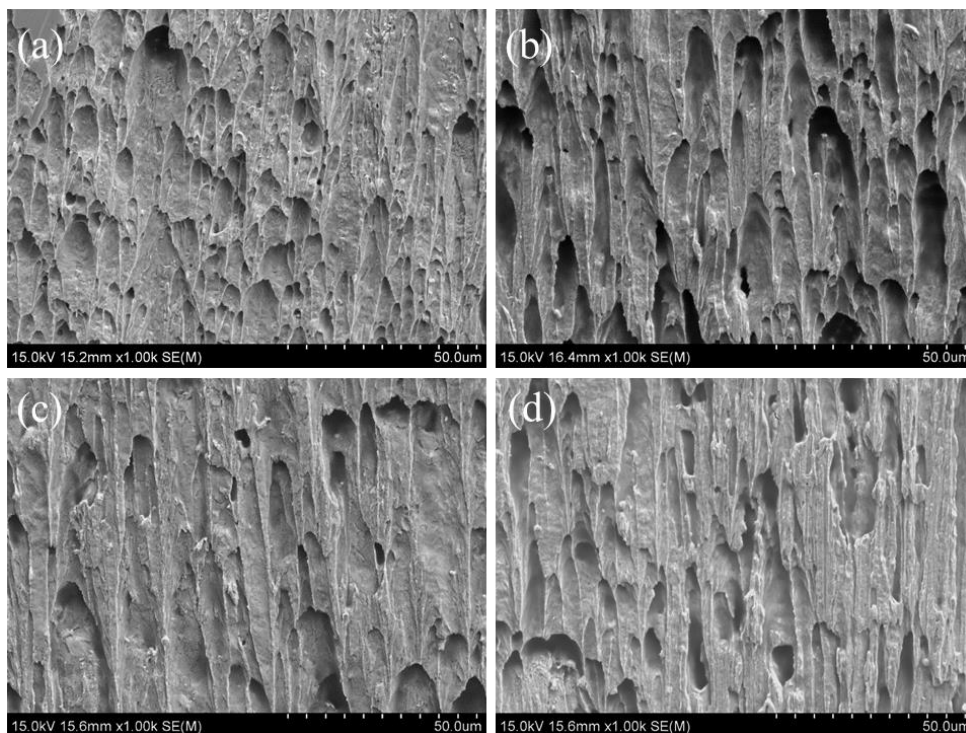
Fracture surfaces of hybrid reinforced Sn1.0Ag0.5Cu composite solder joint with different thermal aging times. (a) 0 h, (b) 168 h, (c) 504 h, (d) 1008 h.
